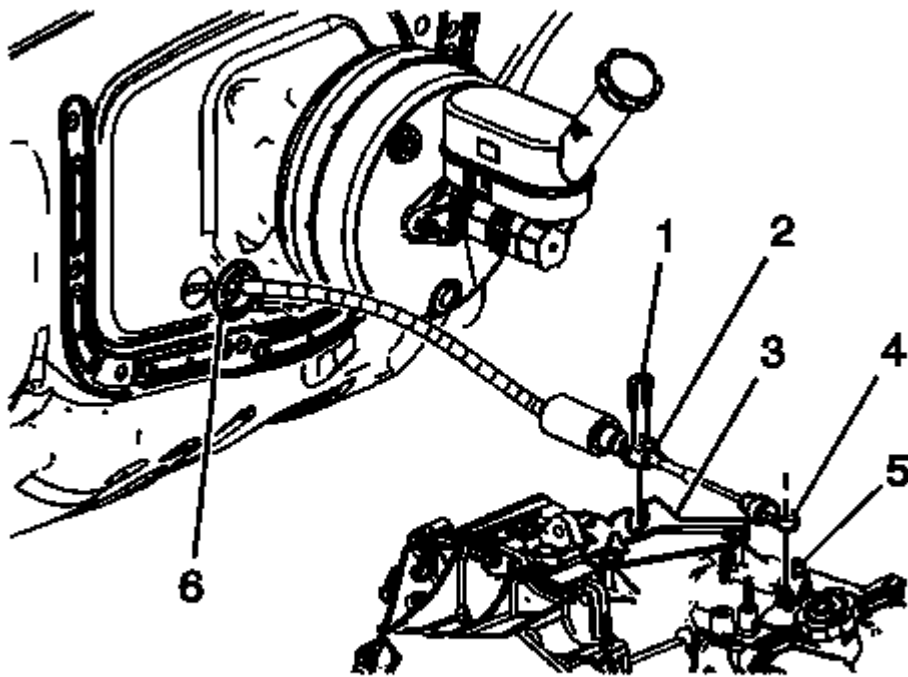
View Of Range Selector Lever Cable Terminal & Manual Shift Lever Pin
